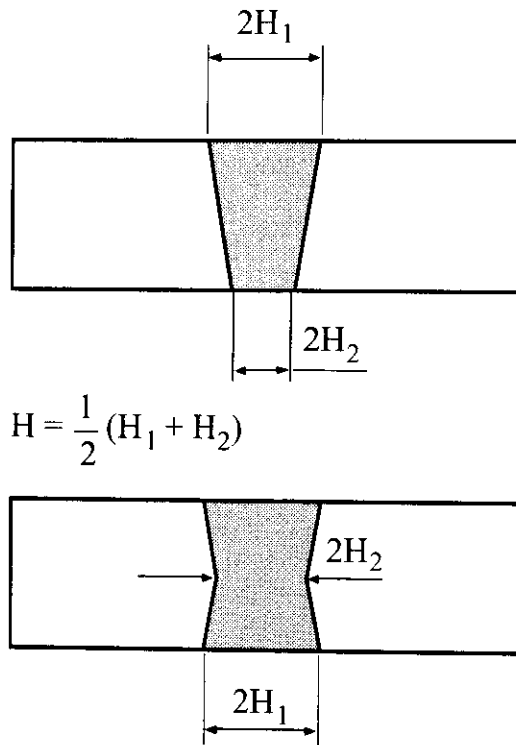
Definition of geometrical parameters of a weld specimen:
